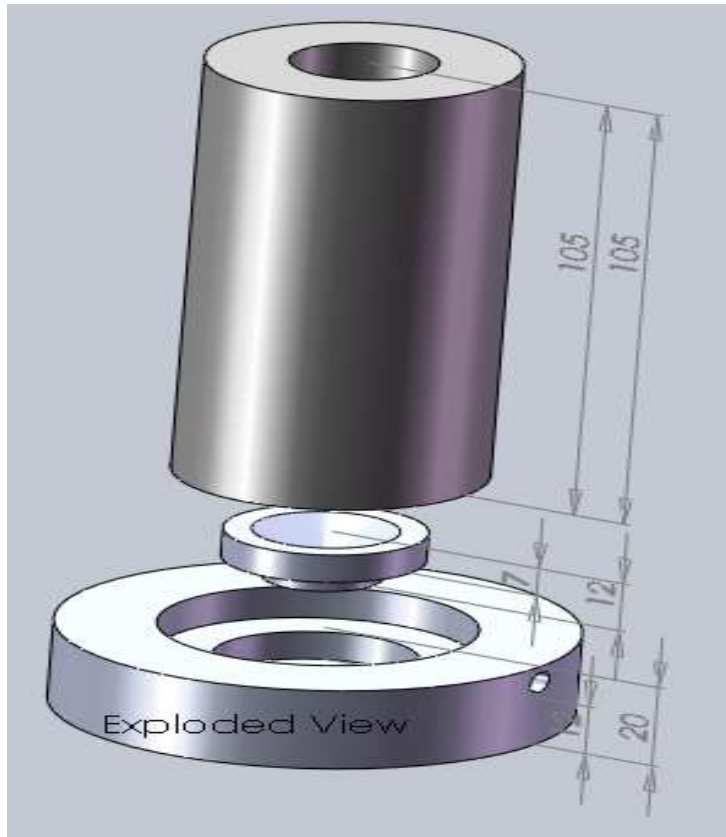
Exploded view of Pencil Leads Extrusion Die
